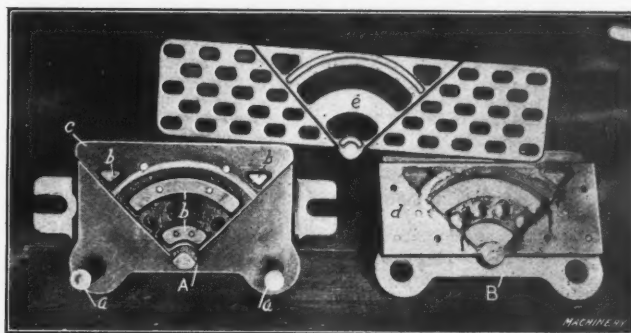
Punch and Die used in drawing up the Edges of the Perforations in the Center of the Miter-box Frame
